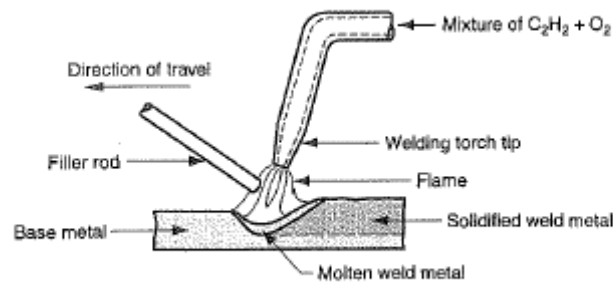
Representation of Oxyacetylene Welding [12]
